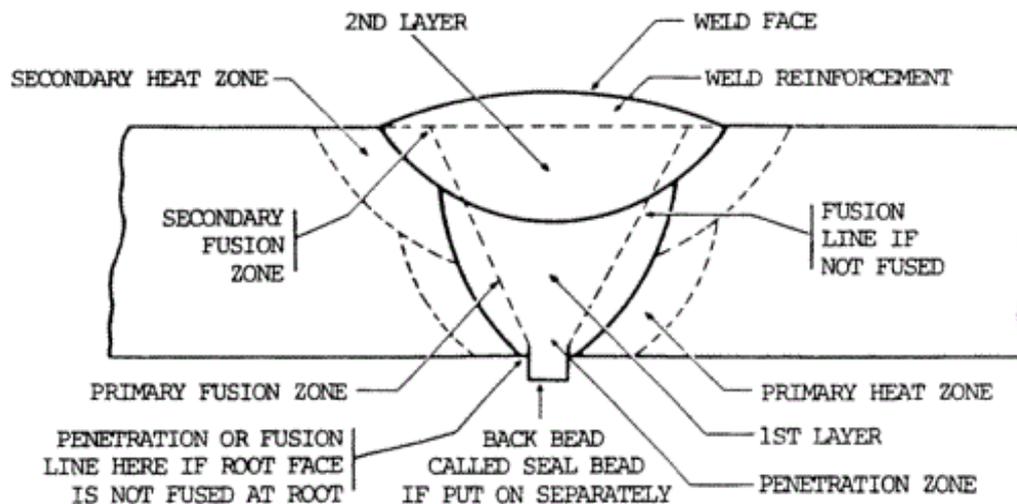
Terms of a Butt Welded Butt Joint
